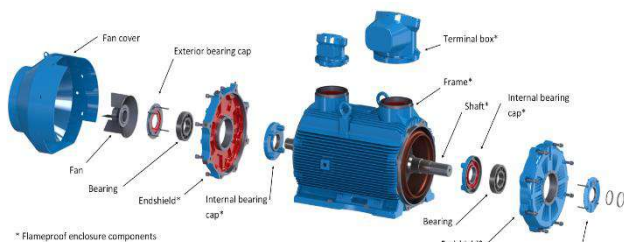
Exploded view of a motor assembly with identification of flameproof components
